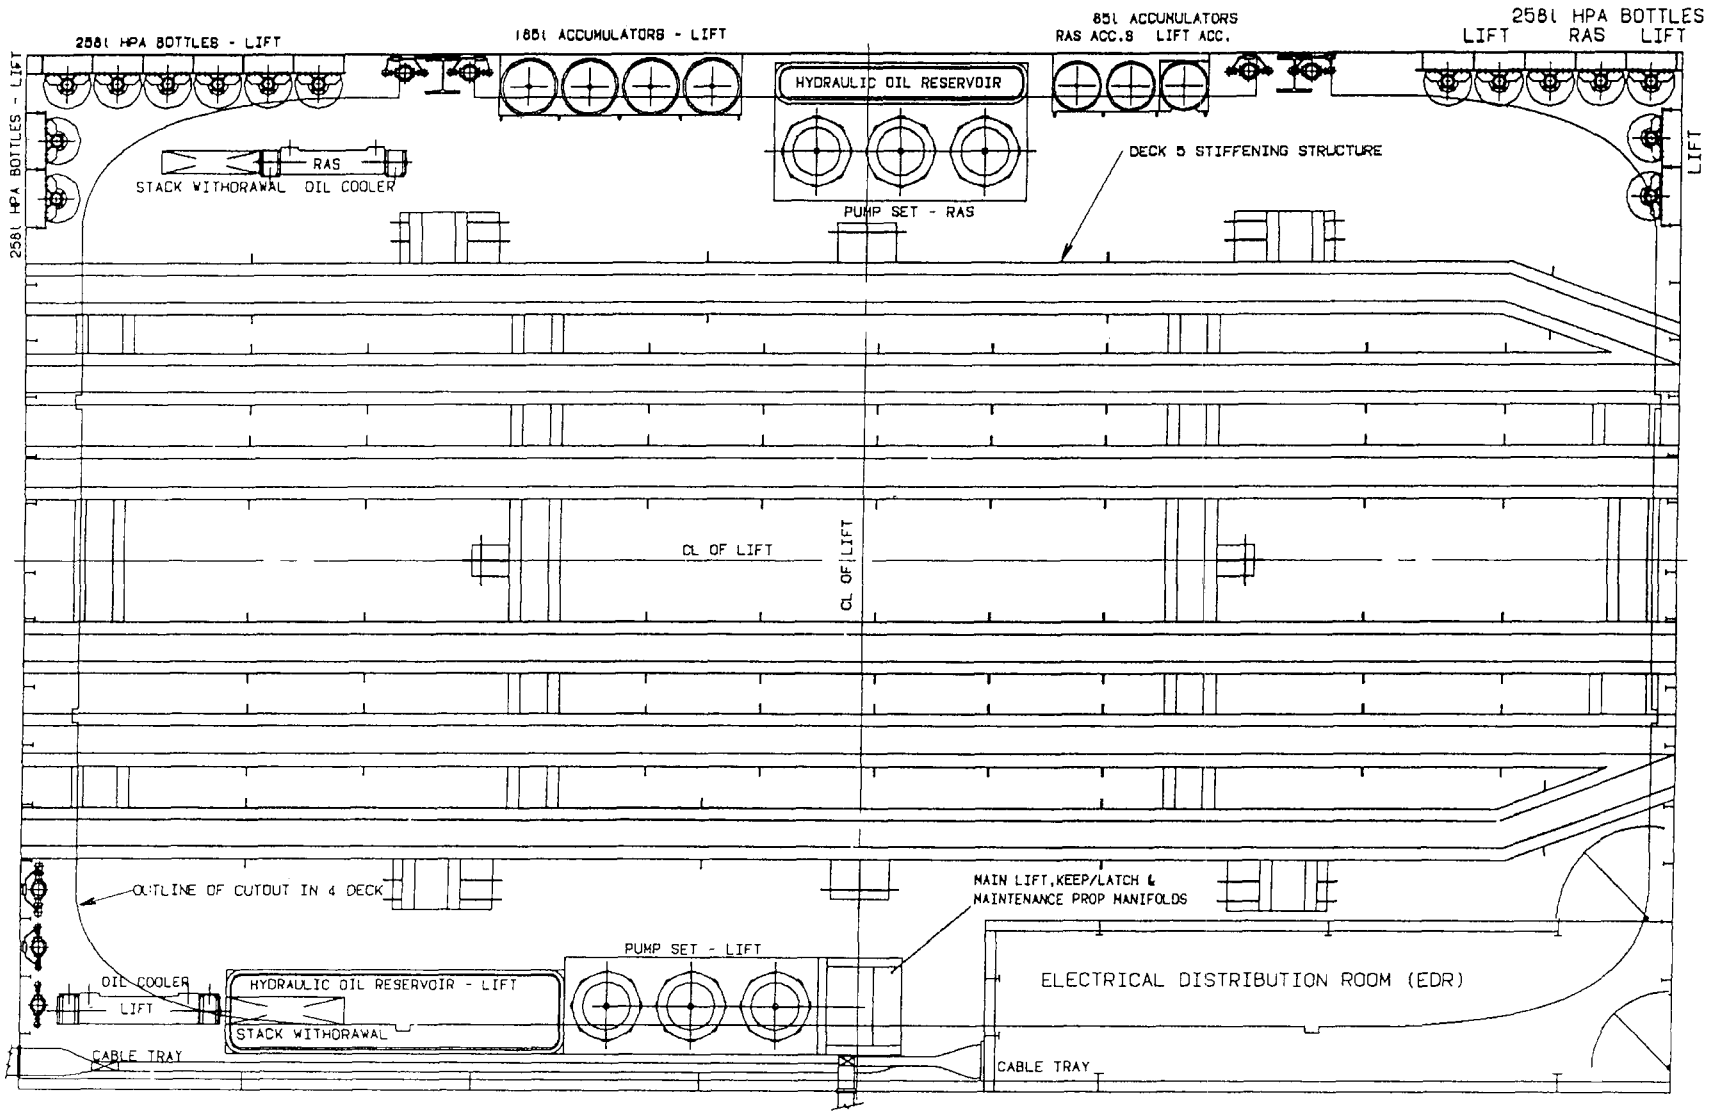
PLAN VIEW OF THE AFT LIFT WELL, REVISED LAYOUT
